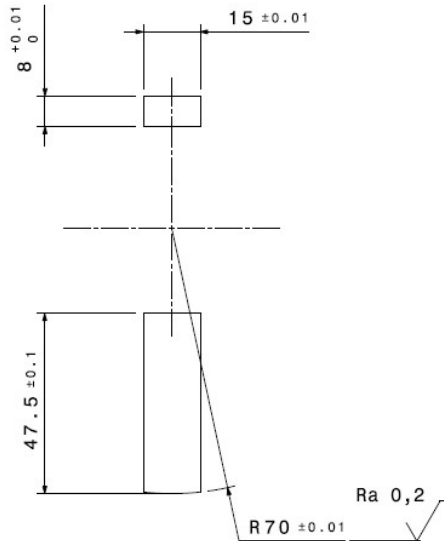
Fretting pad of the second group of tests (dimension in mm).
